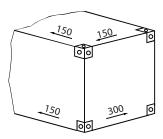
Permissible transverse and vertical compressions on frames of 20' and 40' containers
